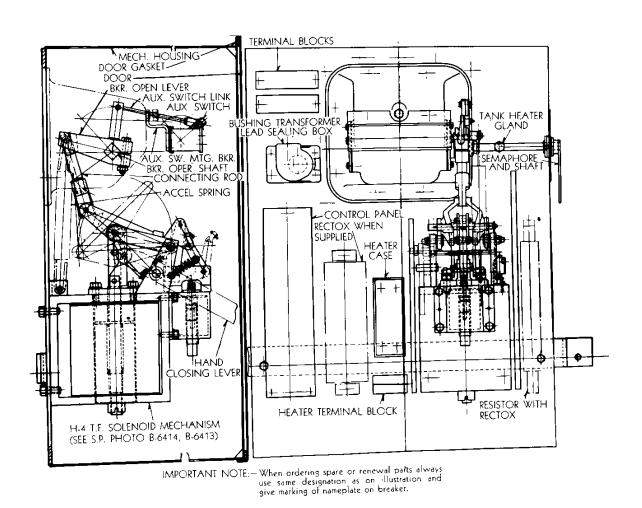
Type H-4 Solenoid Operated Mechanism on Type BJO-B Breaker —Sectional View
